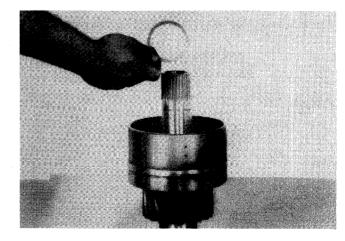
Remove piston return disc spring retainer ring retainer washer.
